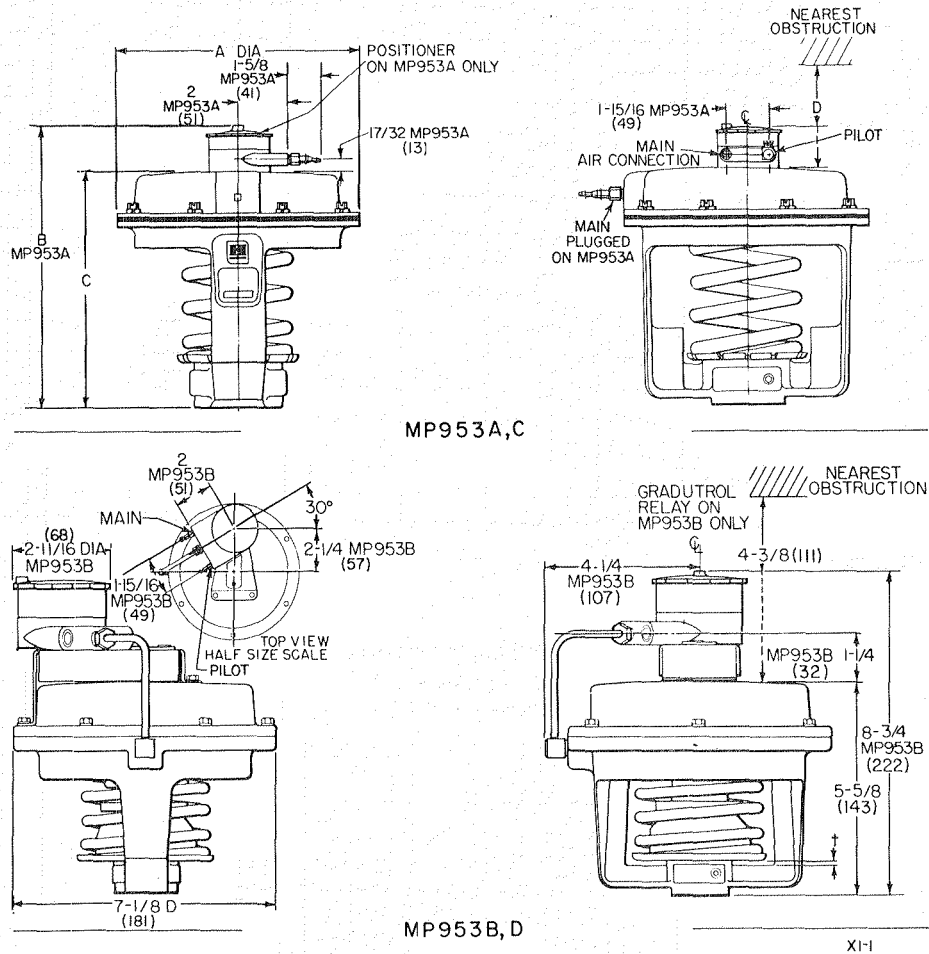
MP953 Approximate Dimensions in Inches (Millimeters). See Table 2.
